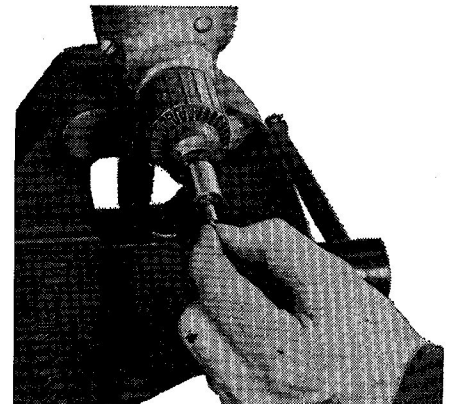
Needle and nozzle assembly can be remated by using an electric drill and polishing compound as shown. Refer to text.
